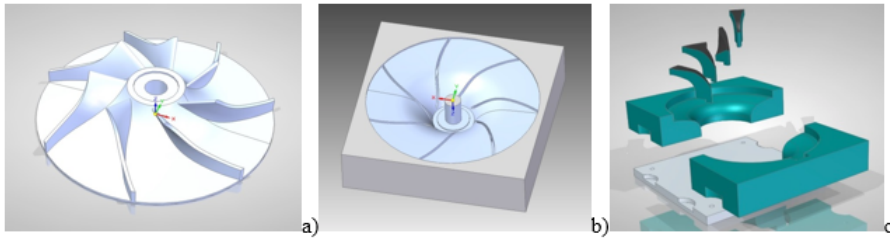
a) CAD modelled centrifugal rotor; b) Boolean operation on the model; c) Exploded operation of a mold segment
